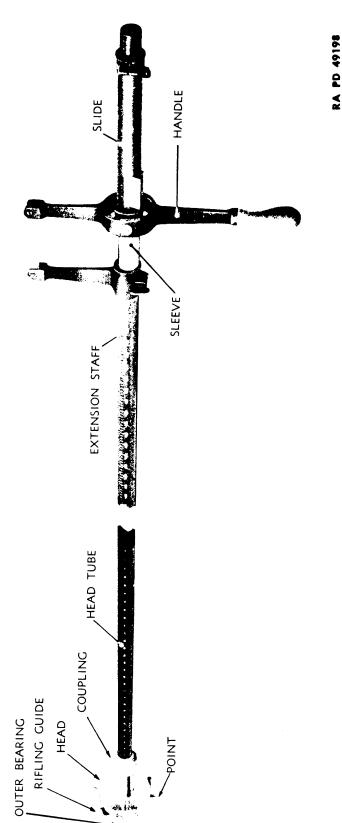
Exterior View of 5.75-inch Star Gage with 4-point Head Assembled for Star-gaging
